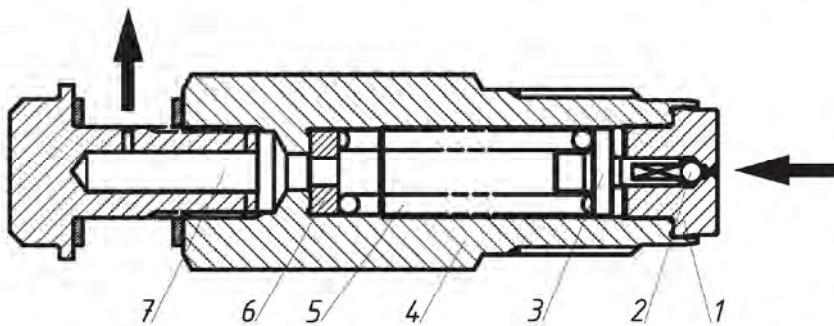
Maximum pressure limiting valve in the accumulator: 1 – ball valve seat; 2 – ball valve; 3 – ball valve pusher; 4 – valve housing; 5 – loading spring; 6 – adjusting washer; 7 – drain line fitting (adapted from [70])
